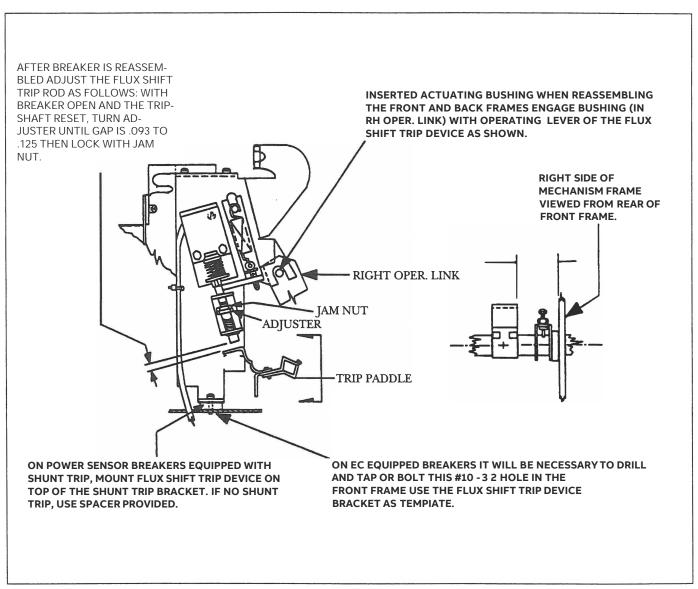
Right Side View of Mechanism Frame Showing Mounting of Flux Shift Trip Device
